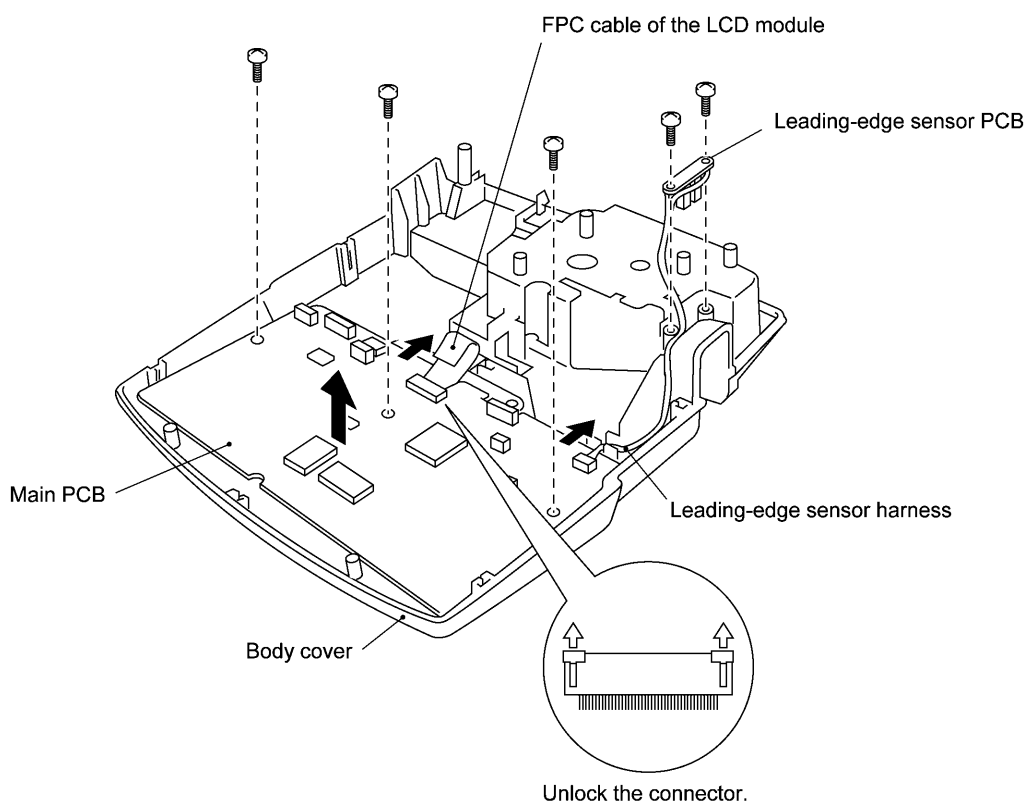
Removing the Main PCB and Leading-edge Sensor PCB
